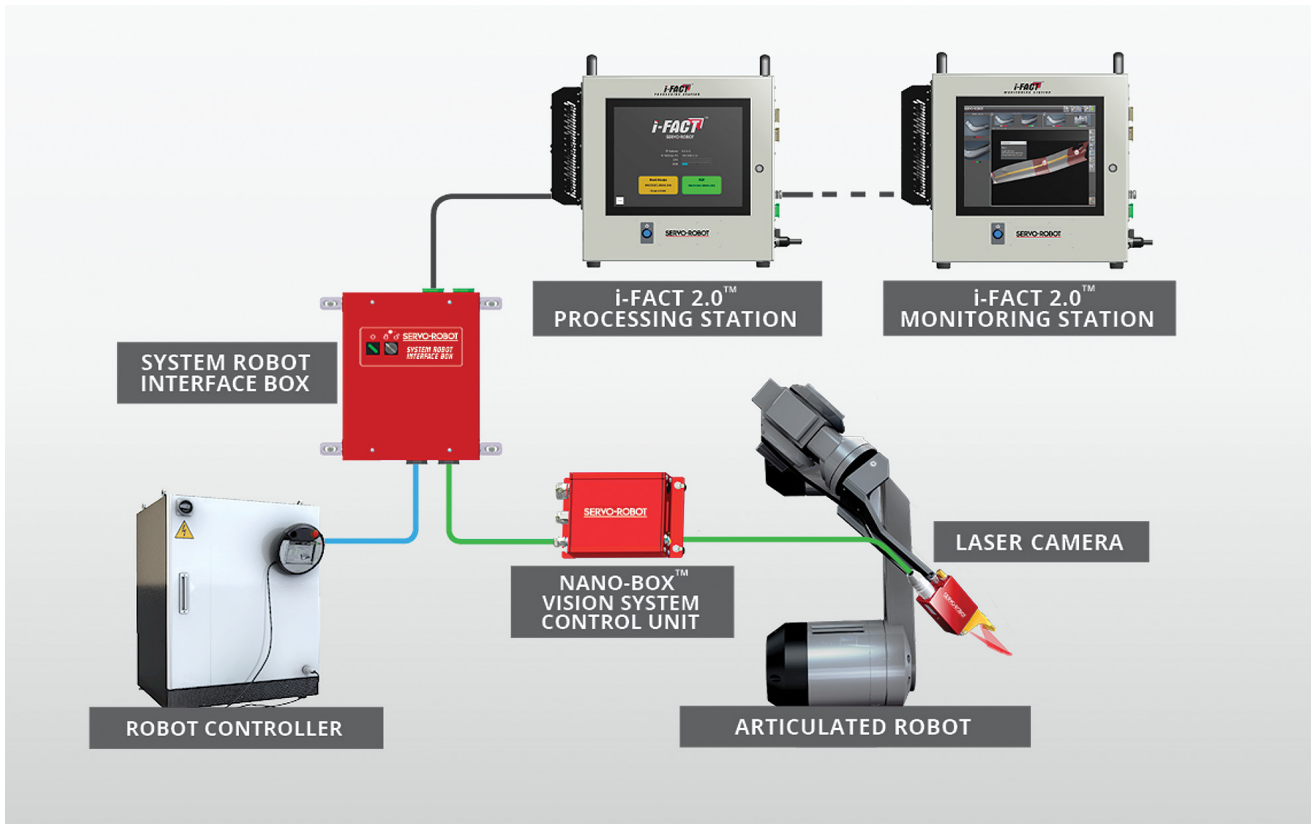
An example of an intelligent robot welding quality control system.
